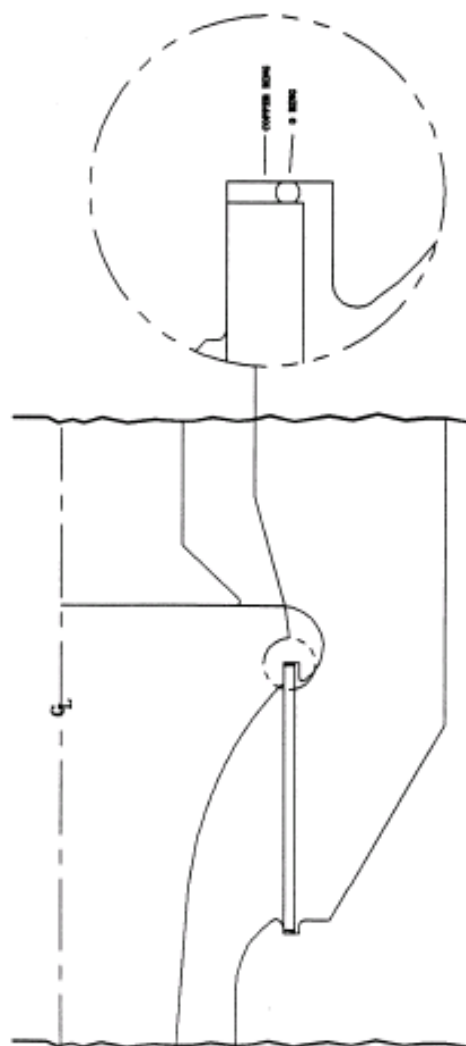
INSULATOR SEAL WITH COPPER RING AND O RING
